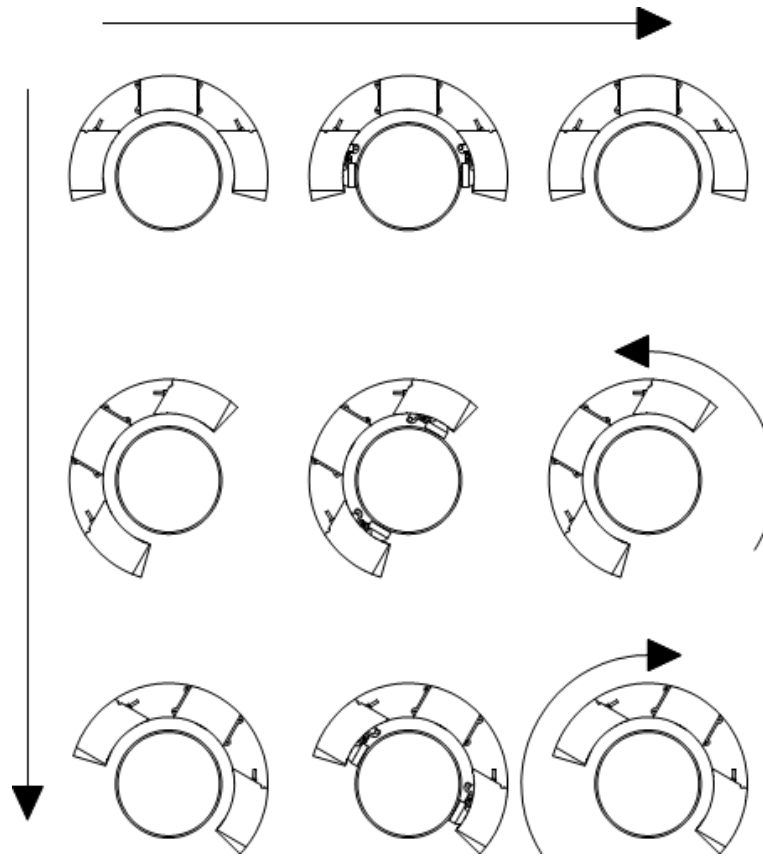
Design of the 180° tool with R-scan UT sensors.
